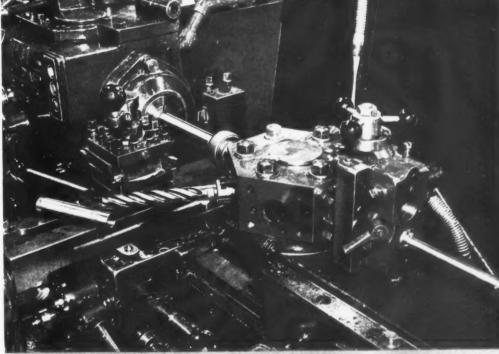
Turret Lathe that Produces Hydraulic Cylinders from Chromiummolybdenum Steel Tubing, Turned, Drilled, Threaded, and Bored
